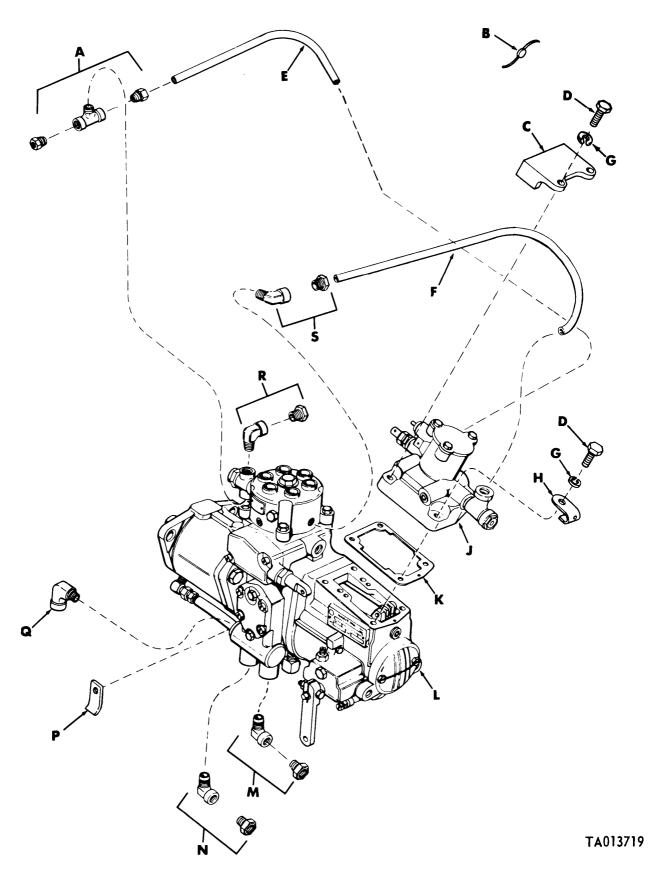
Code B fuel injection pump assembly, partial exploded view.
